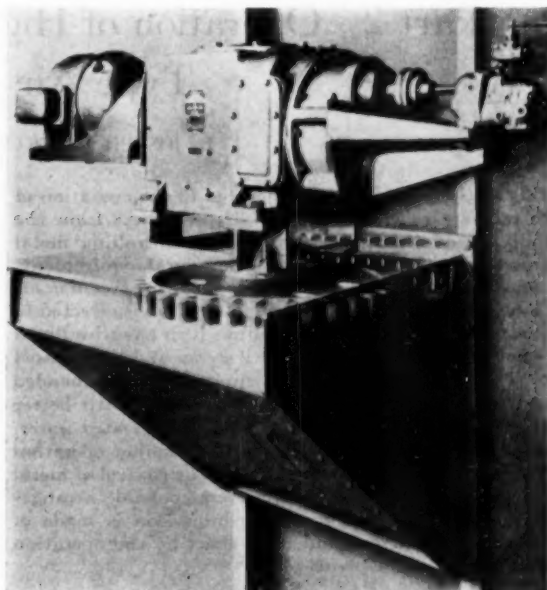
TYPICAL DRIVE UNIT WITH AUXILIARY AIR MOTOR FOR VERTICAL OR INVERTED HEATER
